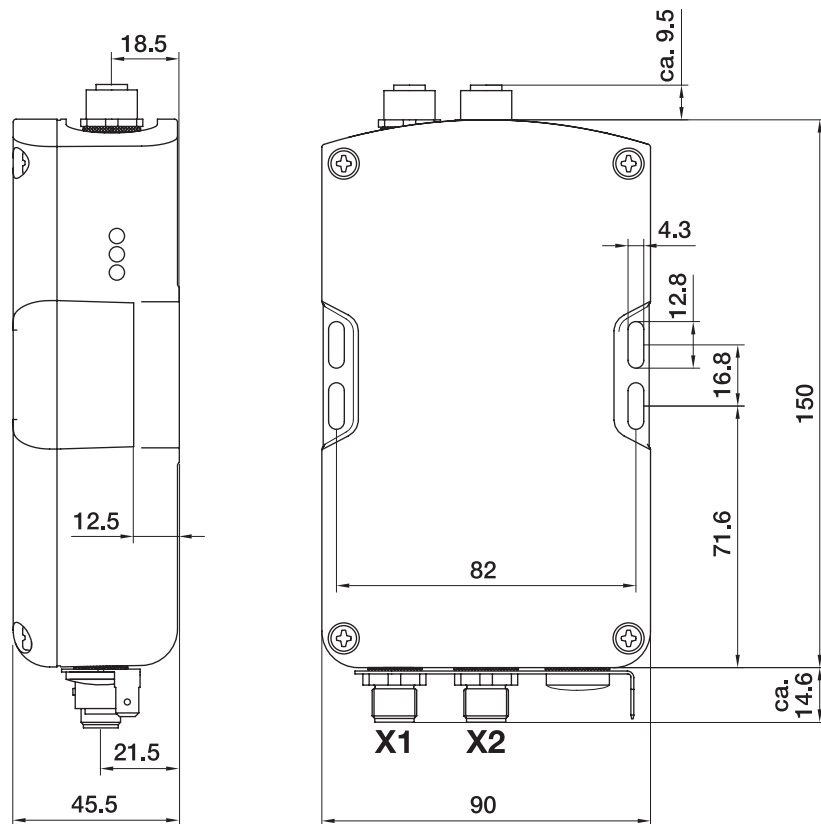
BIS M-6000-007-050-00-ST15 – dimensions in mm
